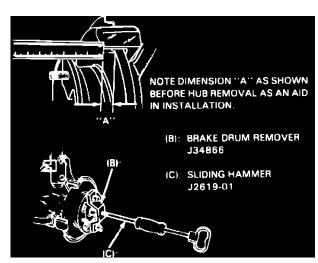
Checking dimension ``A'' to assure proper installation of hub
